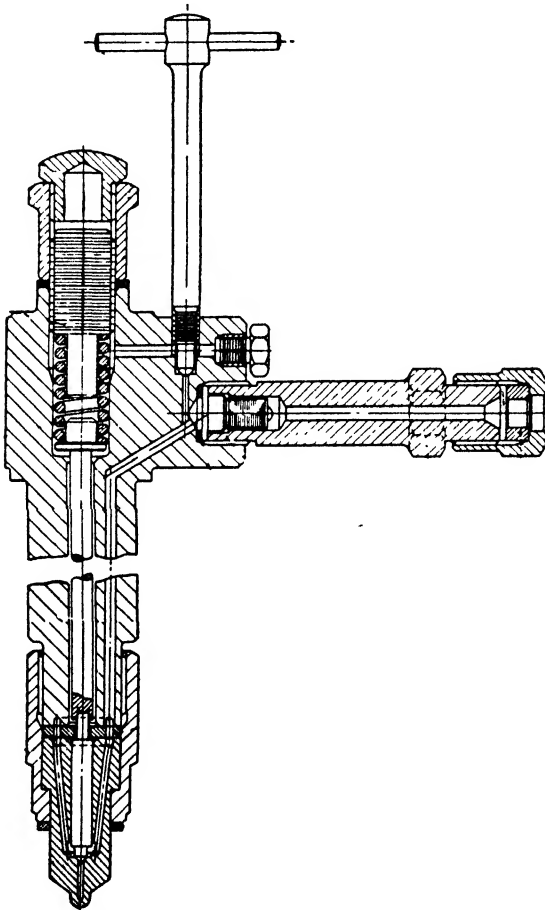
SCINTILLA INJECTION NOZZLE.
